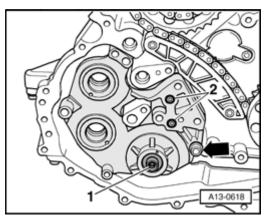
Removing/Installing Compression Spring From/To Shaft For Drive Spur Gear, O-Rings, Bolts & Front Bearing Cap From Cylinder Block
